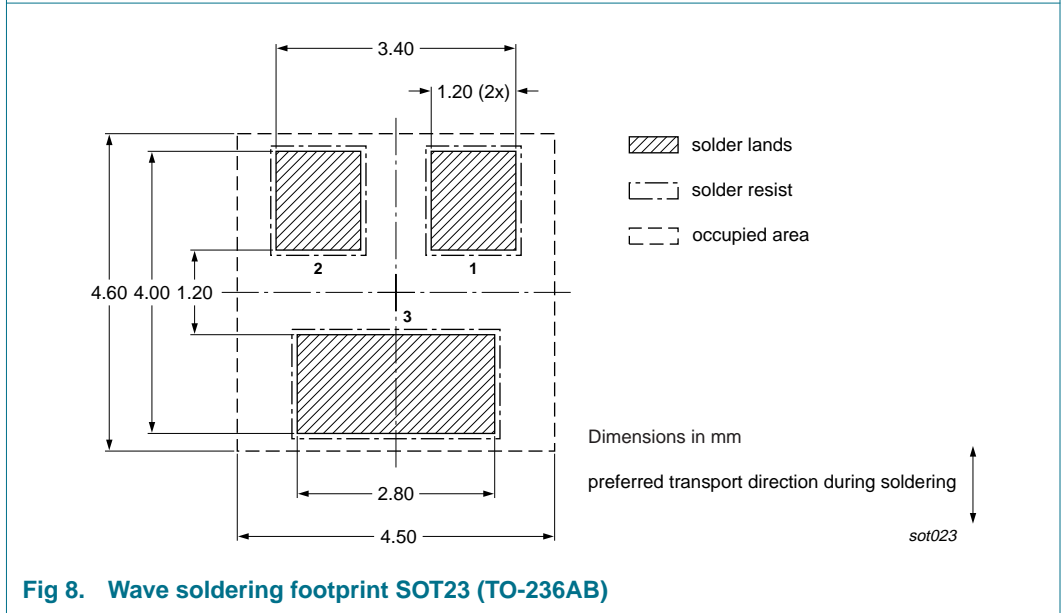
Wave soldering footprint SOT23 (TO-236AB)
